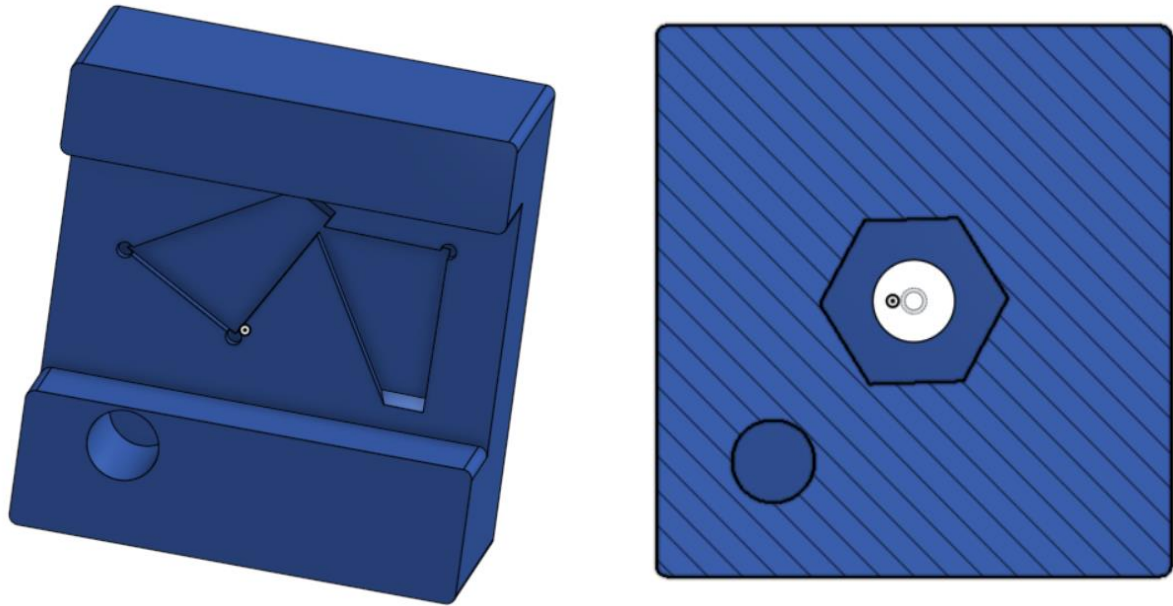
Anamorphic Prism Pair, Bottom Half with Section View
